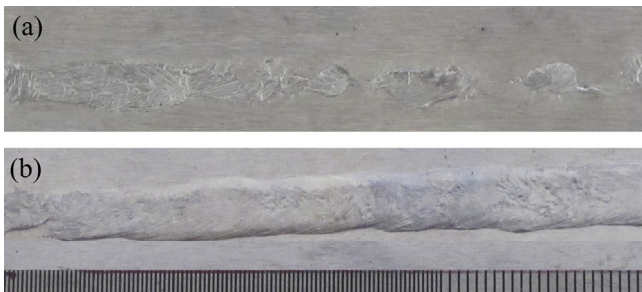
Back weld appearance: (a) conventional TIG with Zn interlayer and (b) pre-roll assisted A-TIG with Zn interlayer.
